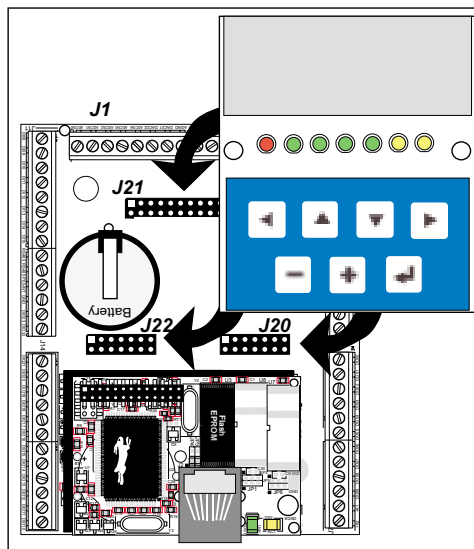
Install LCD/Keypad Module on BL2100 Main Board
